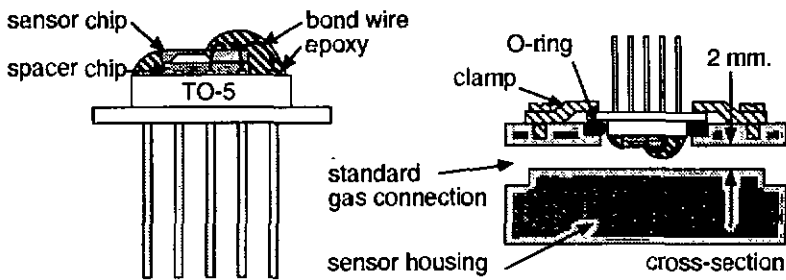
Cross section of the TO-5 housing and the mounting to the test tube.
